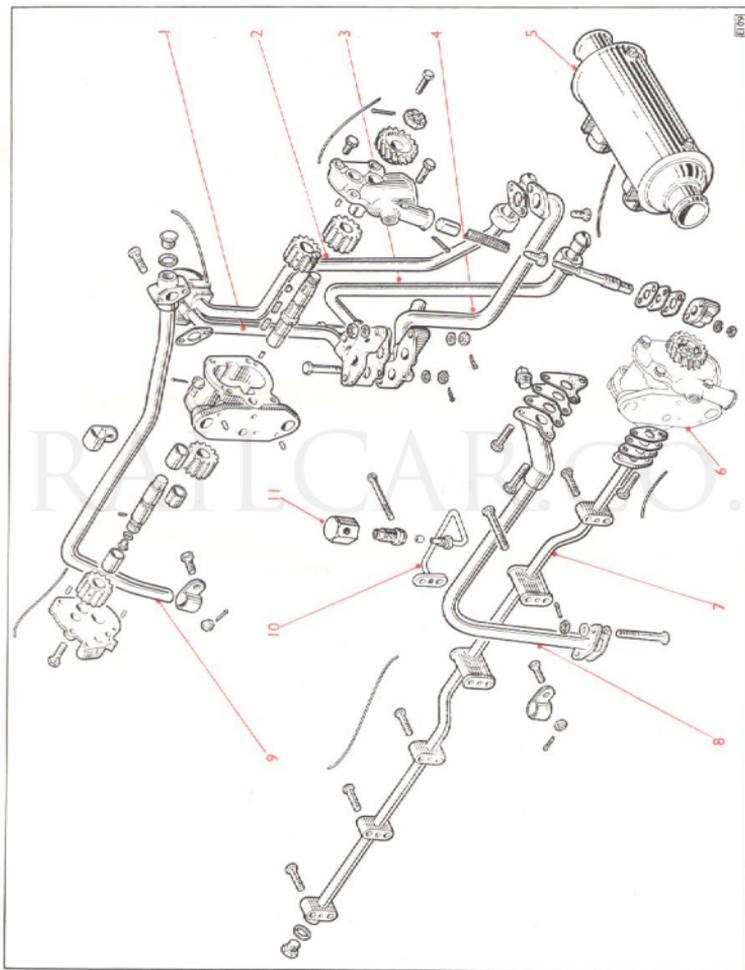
Exploded view of oil pumps and lubrication pipes.
